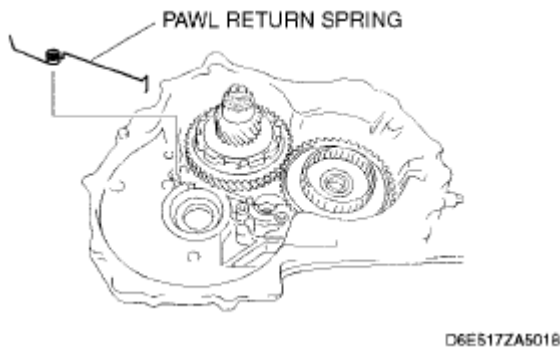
View Of Pawl Return Spring And Transaxle Case
